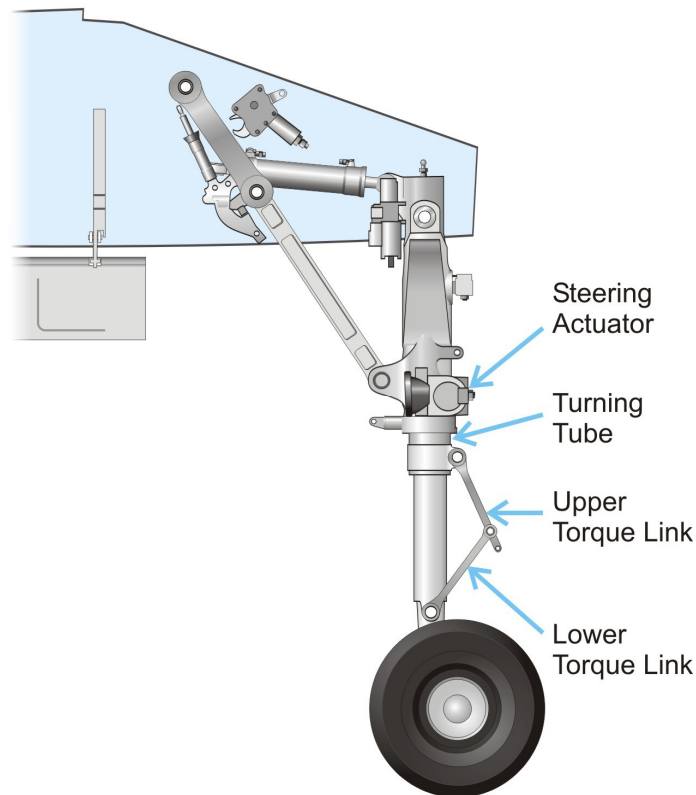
3-10-00 - NOSE WHEEL STEERING SYSTEM - LH SIDEVIEW
